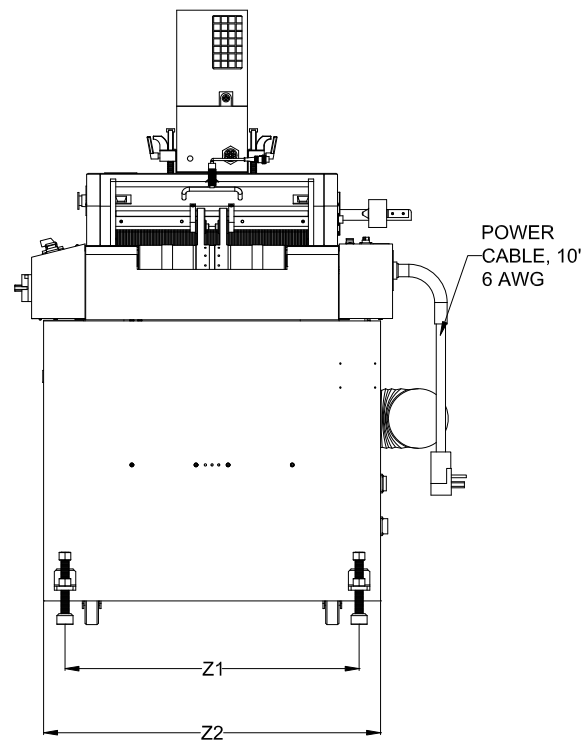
BK750 UV Curing Base Dimensions - Rear View.
